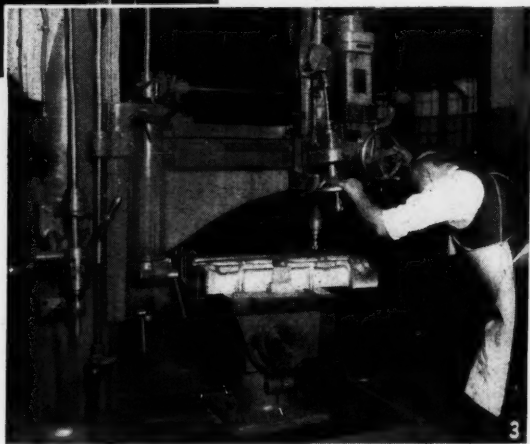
Flat surfaces are machined on this planer. Fig. 3—Large castings are drilled or counterbored on the radial drill.
